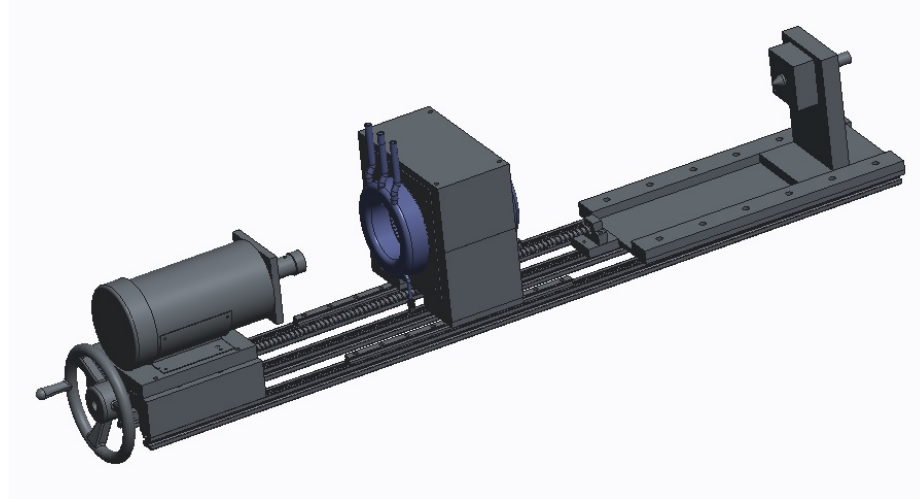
Back EMF Test Fixture for Danfoss Turbocor.⁶
